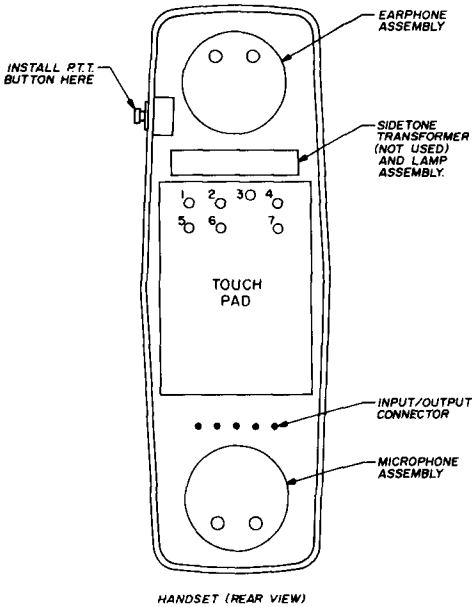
Rear view of the handset showing suggested location for mounting the PTT switch.
